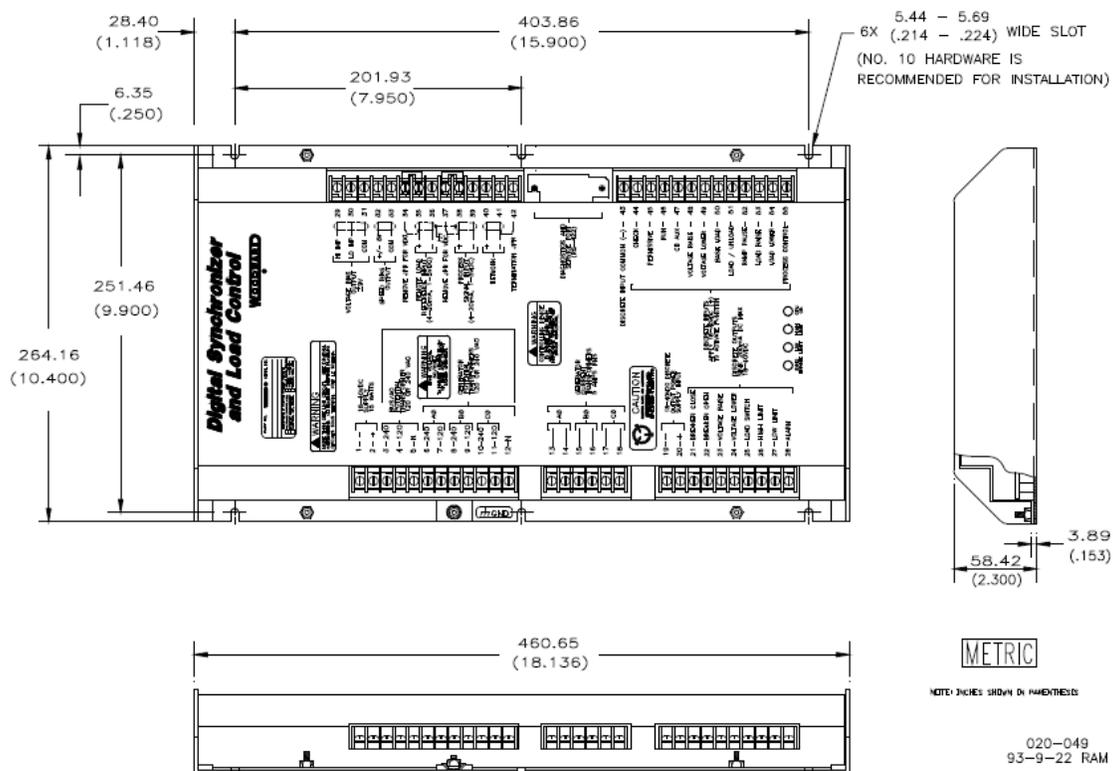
Mounting Hole Pattern and Dimensions of Original DSLCL
